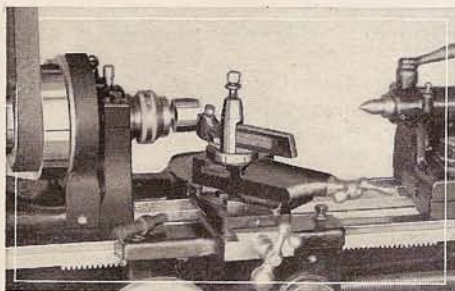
Machining Jewelers' Plunger Blank in Hand Wheel Draw-in Collet Chuck.
